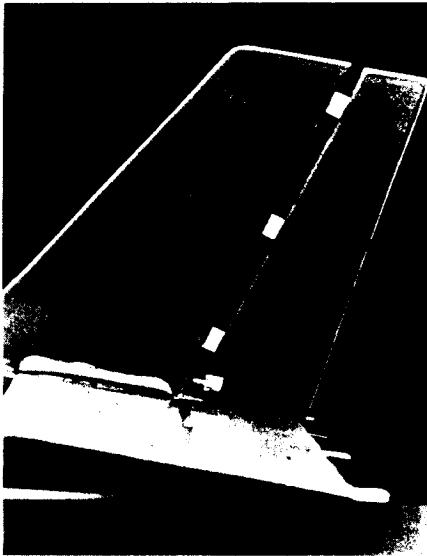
Slide the control surface over the hinges. On this plane I glued the rudder in place first. On some planes, if you do this, you won't be able to get the elevator on. Test fit the surfaces on your plane before you start gluing.
